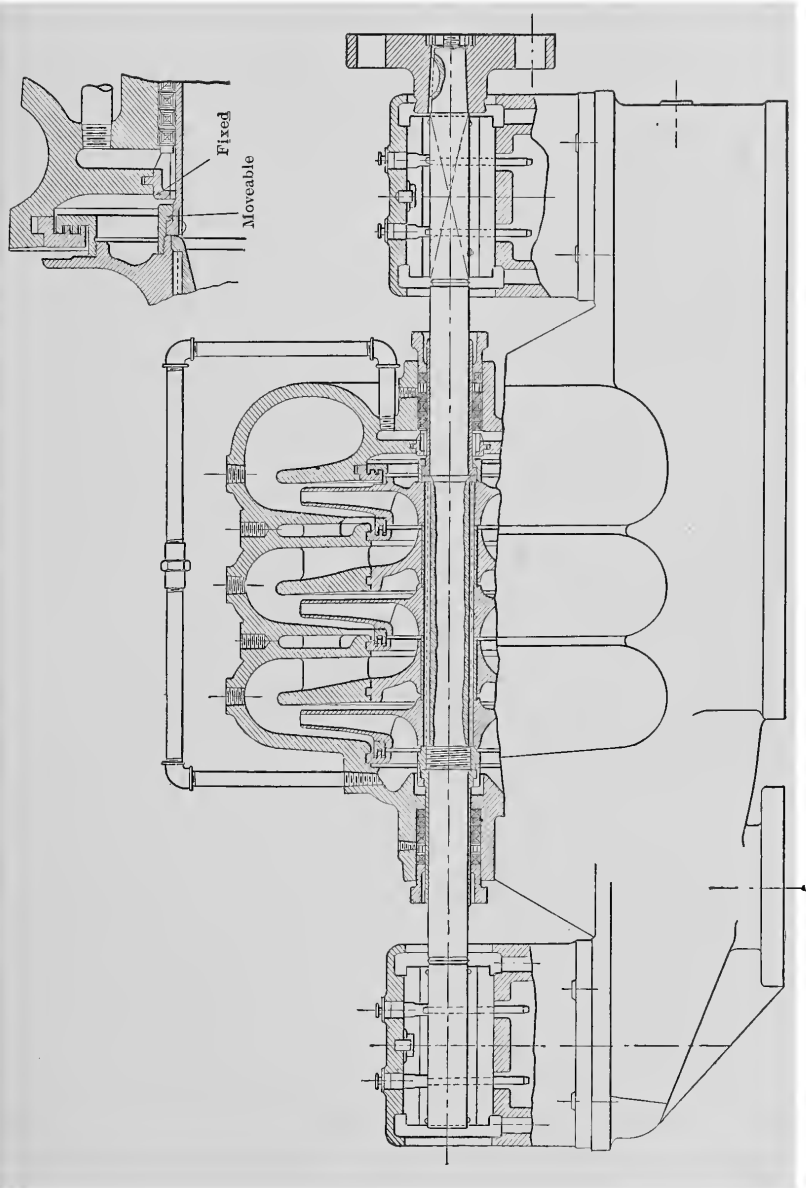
Hydraulic balancing piston. (*De Laval Steam Turbine Co.*)
